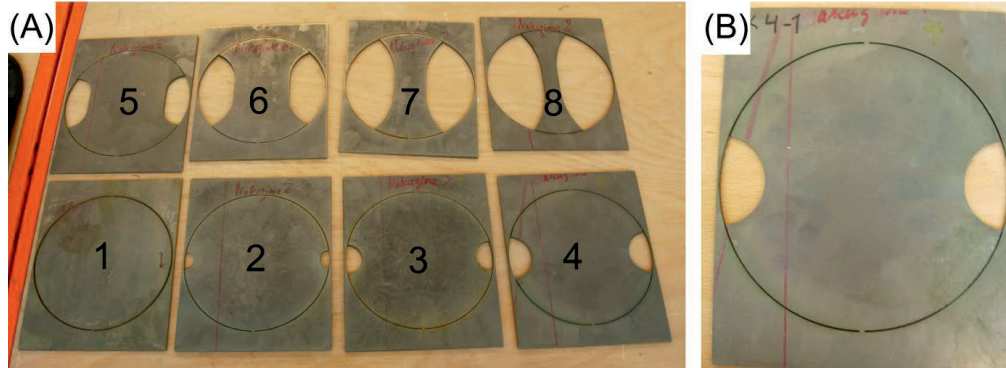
(A) Nakajima test geometries, and (B) close-up of a specimen attached to the rectangular blank [22].
